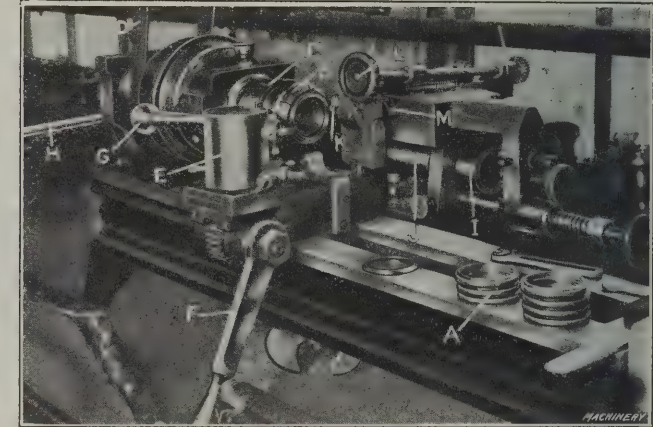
Cutting the Thread on a Screw Watch Case Center
